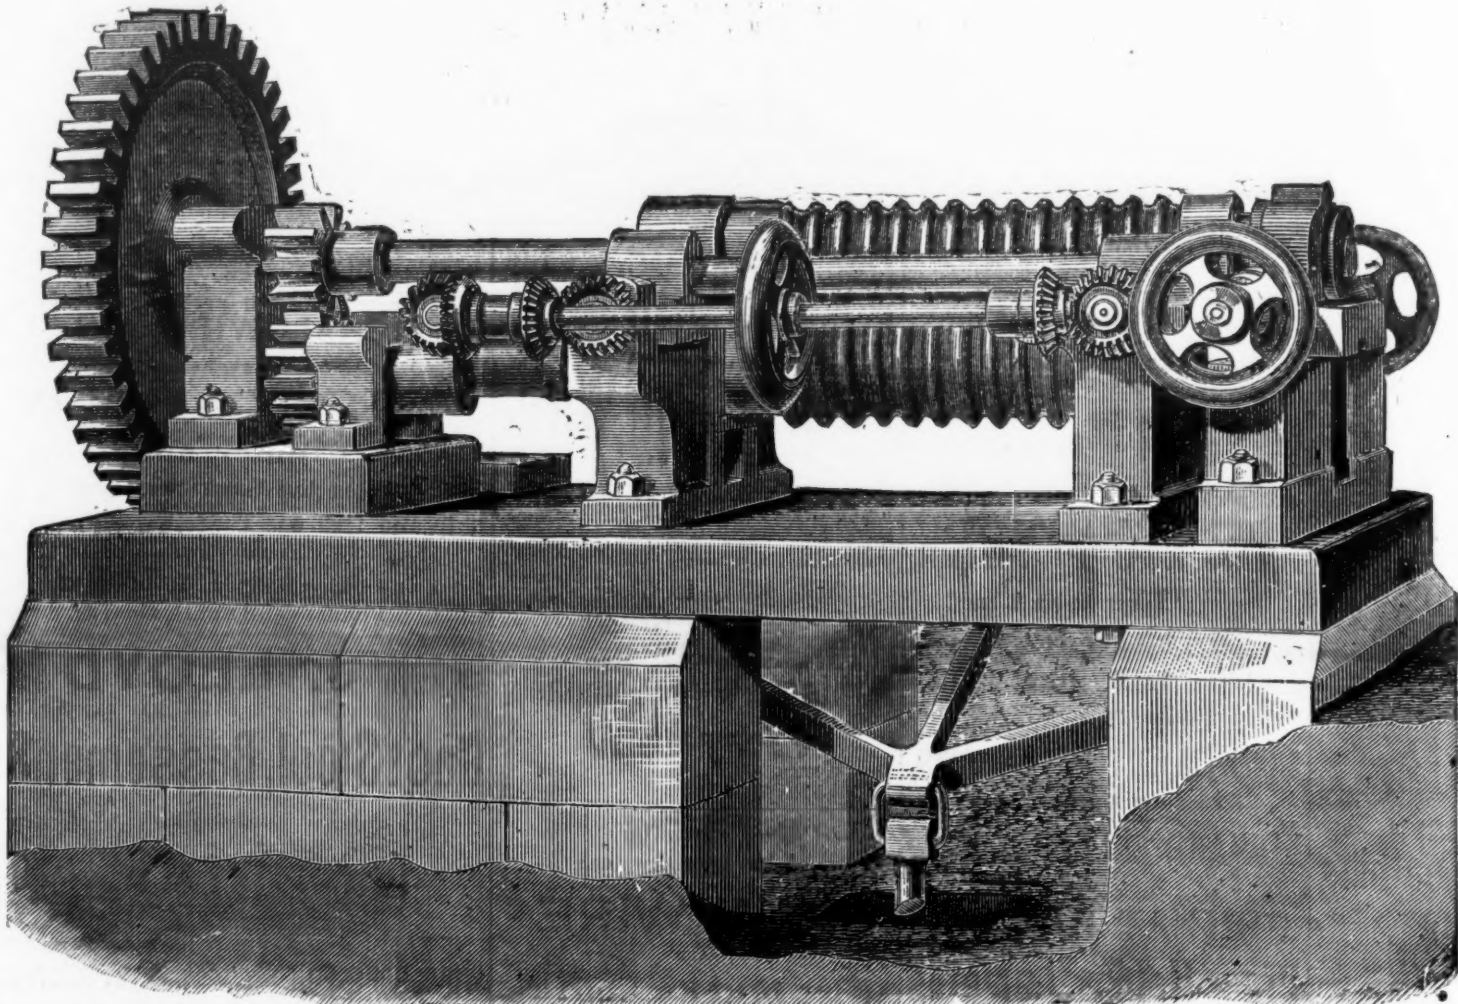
MACHINE FOR MAKING CORRUGATED BOILER TUBES.
